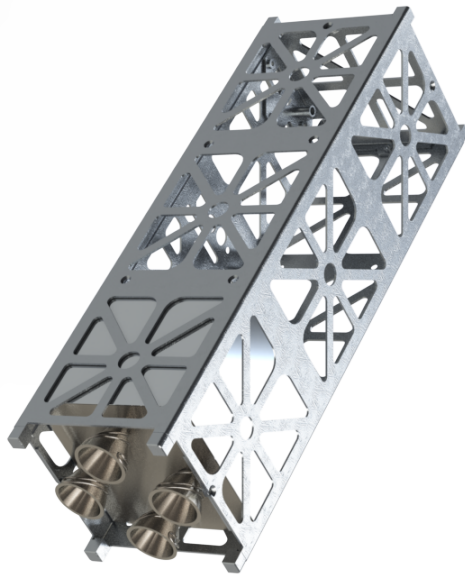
Three dimensional drawing of the primary propulsion system incorporated into a 3 U CubeSat chassis.
